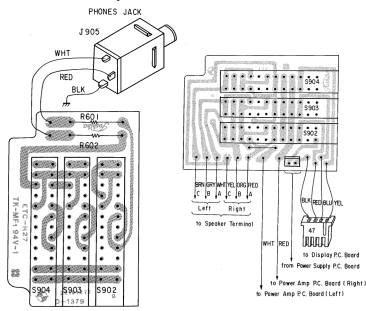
SPEAKER P.C. BOARD (ETC-H27)
